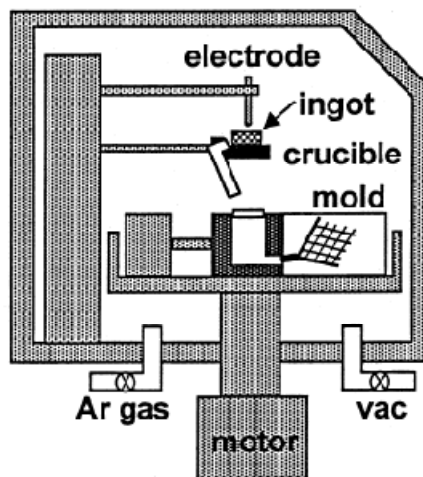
Ultra High Speed Centrifugal Titanium Casting Machine [8]
